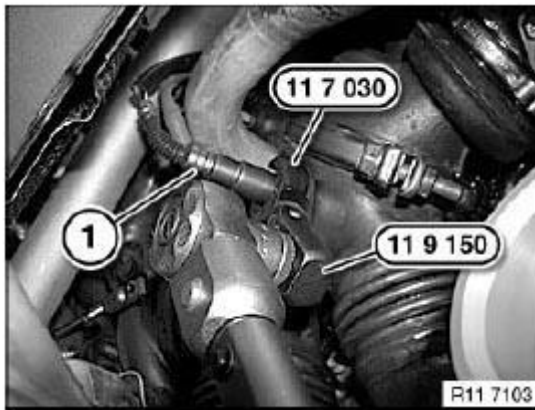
Releasing Oxygen Control Sensor With Special Tools (11 7 030) And (11 9 150)
